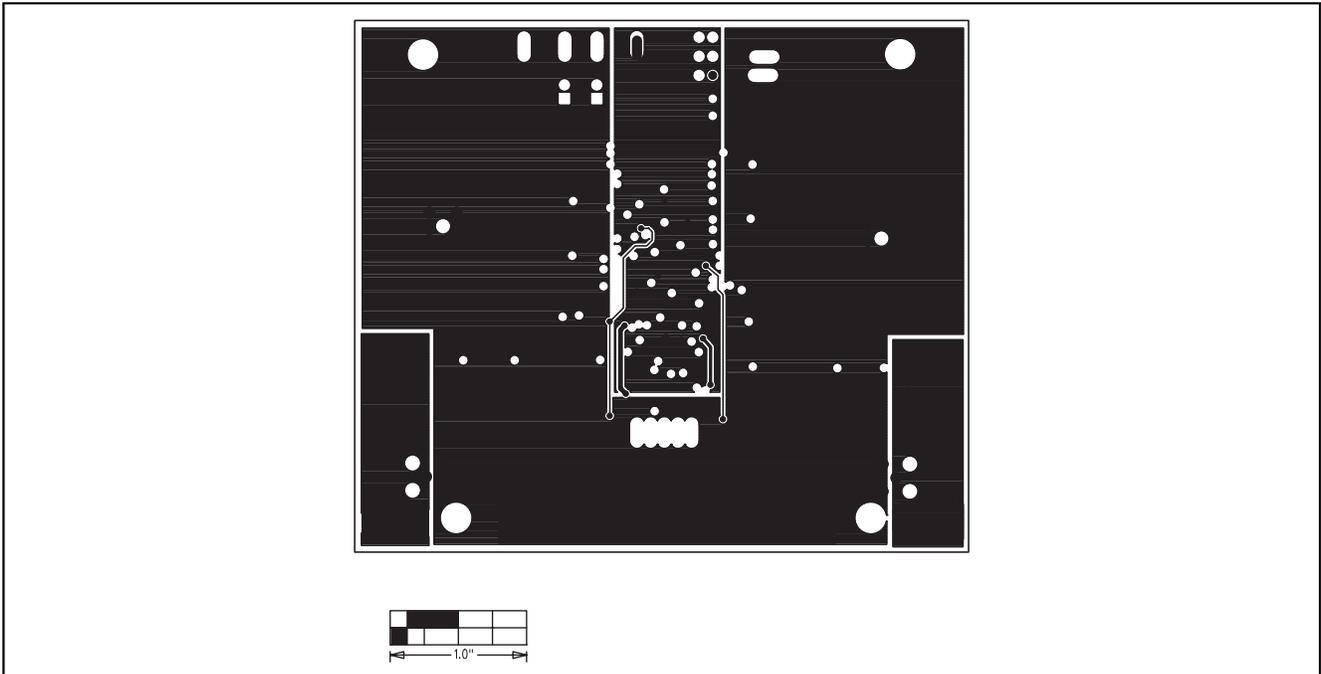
MAX1955 EV Kit PC Board Layout—Layer 2
